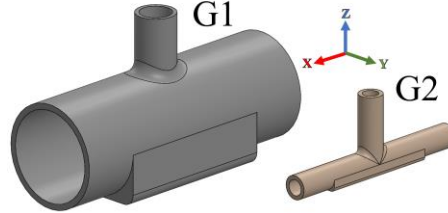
Axonometric view of the connectors – geometry 1 – G1 and geometry 2 – G2.
